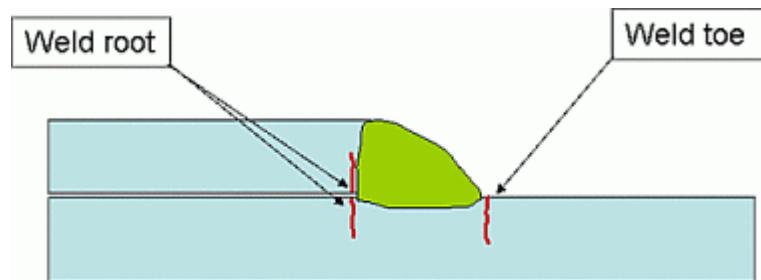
Fillet weld cross-section showing likely failure locations
